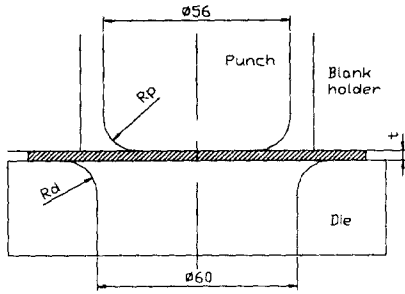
Dimensions of the tools used for the simulation in the first drawing process
